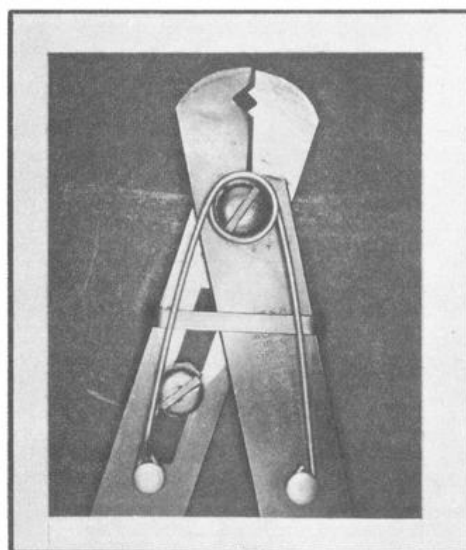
Adjustable Wire Stripper (Use with Caution)
